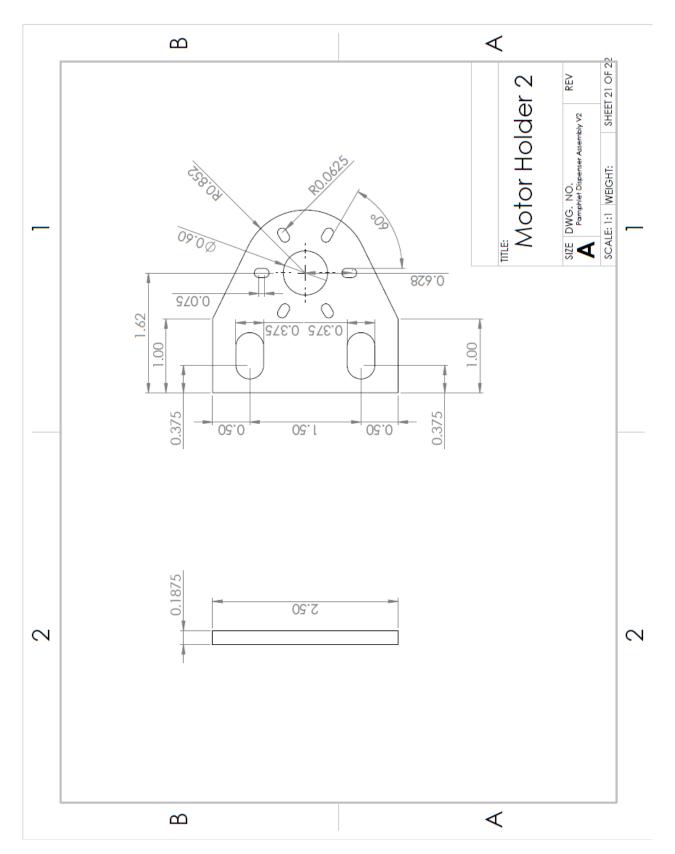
Pamphlet Dispenser Motor Holder 2 Drawing (not to scale)
